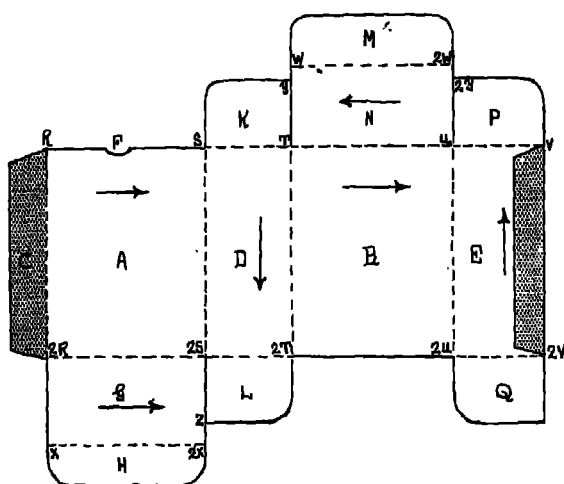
USEFUL SINGLE-PIECE EXAMPLE FOR BLACKBOARD CHALK AND CRAYON COMPANIES.
